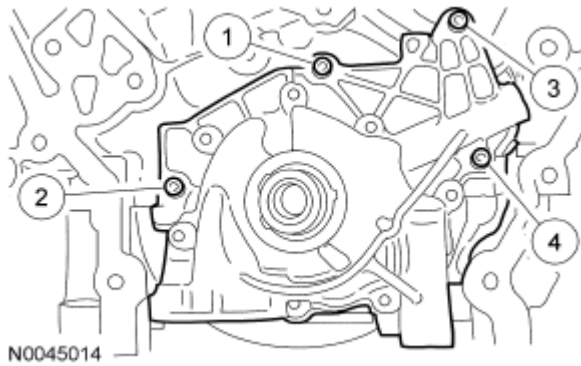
Locating Tightening Sequence Of Oil Pump Bolts
